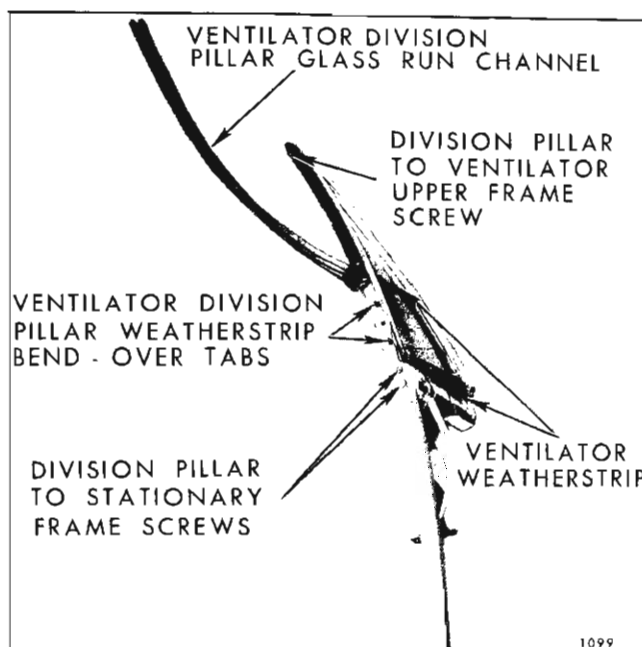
D69—Rear Door Ventilator Assembly - 68069 Style
